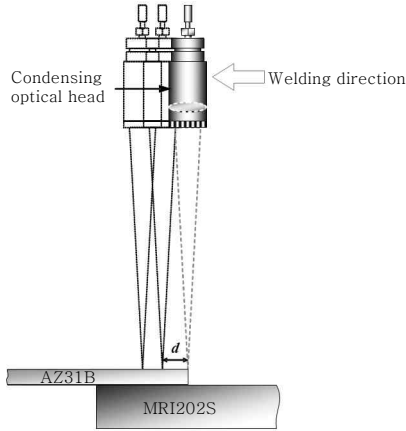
Schematic illustration of fillet welding with CW fiber laser
